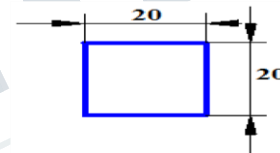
Shows Hardness test specimen (All dimensions are in mm)
